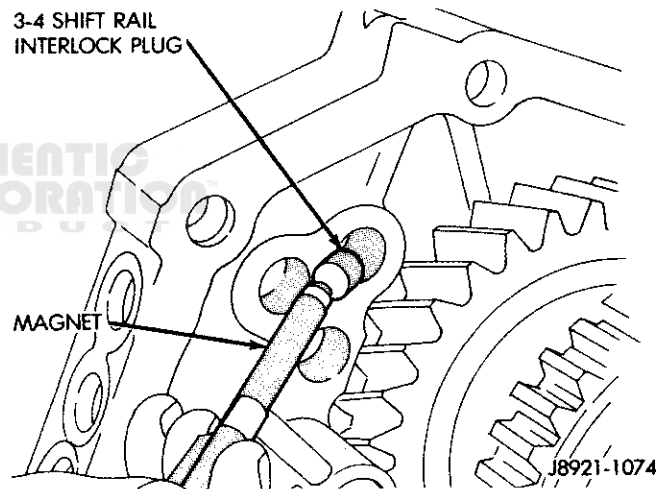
Removing 3-4 Shift Rail Interlock Plug
